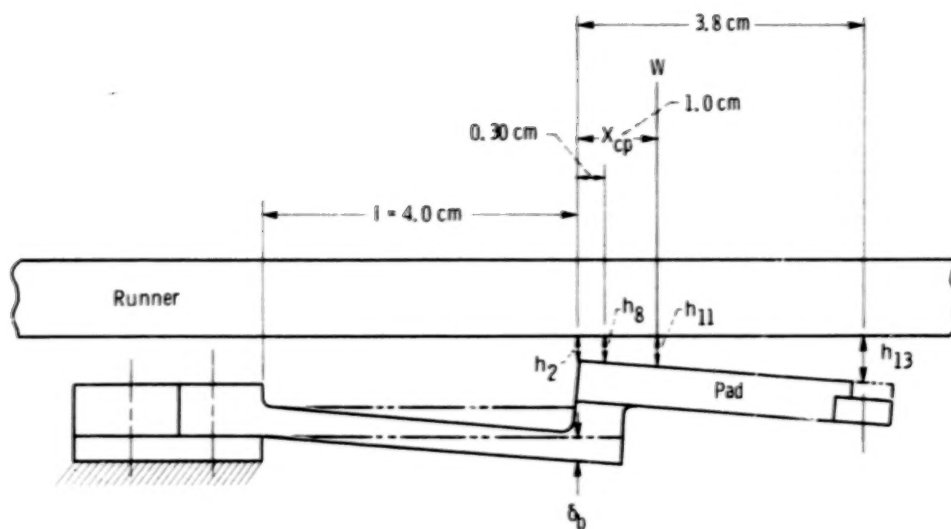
Schematic of cantilever-mounted pad showing probe locations.
